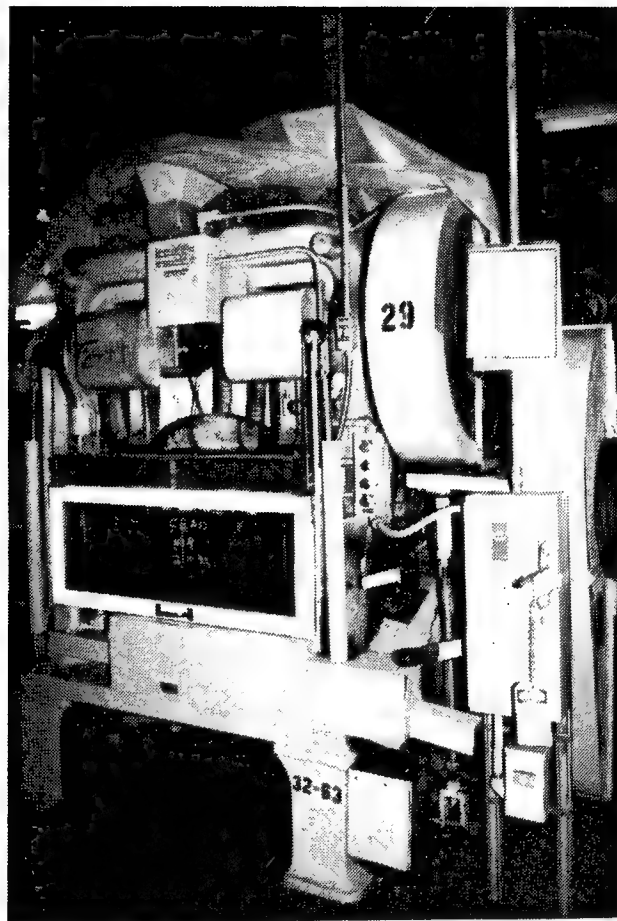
Building 4: Bullet Assembly Machine manufactured by Waterbury-Farrel.
